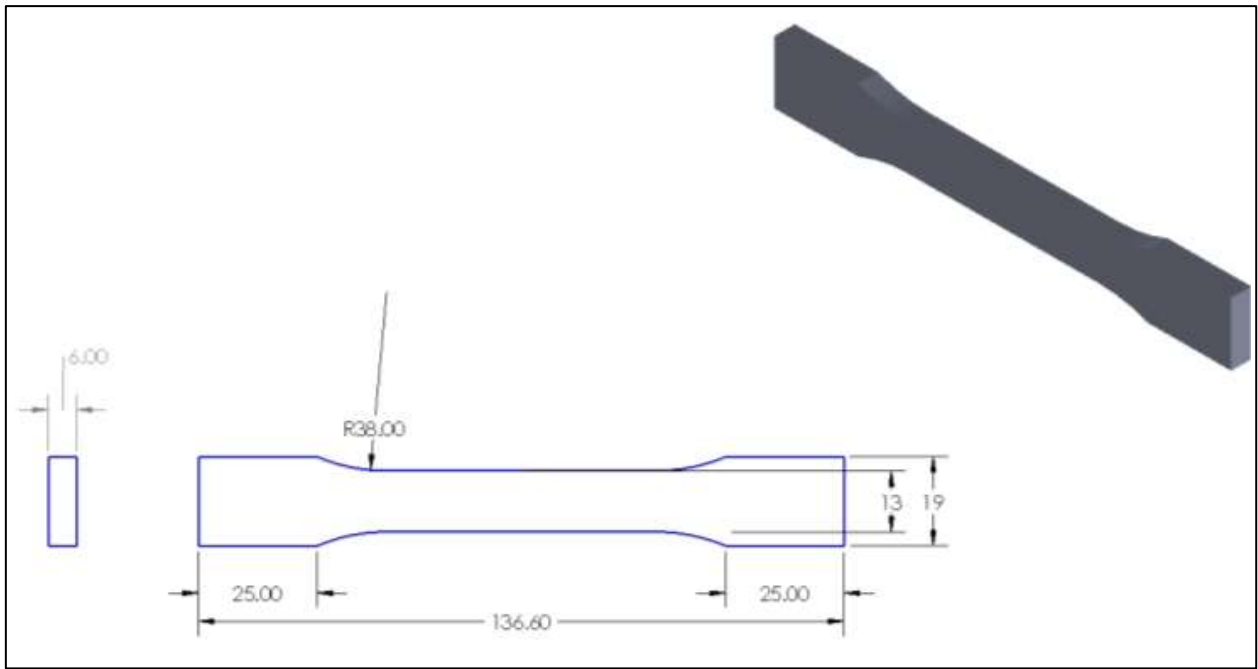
Geometry of the tensile test specimen according to ASTM D638 standard (all dimensions are in mm).
